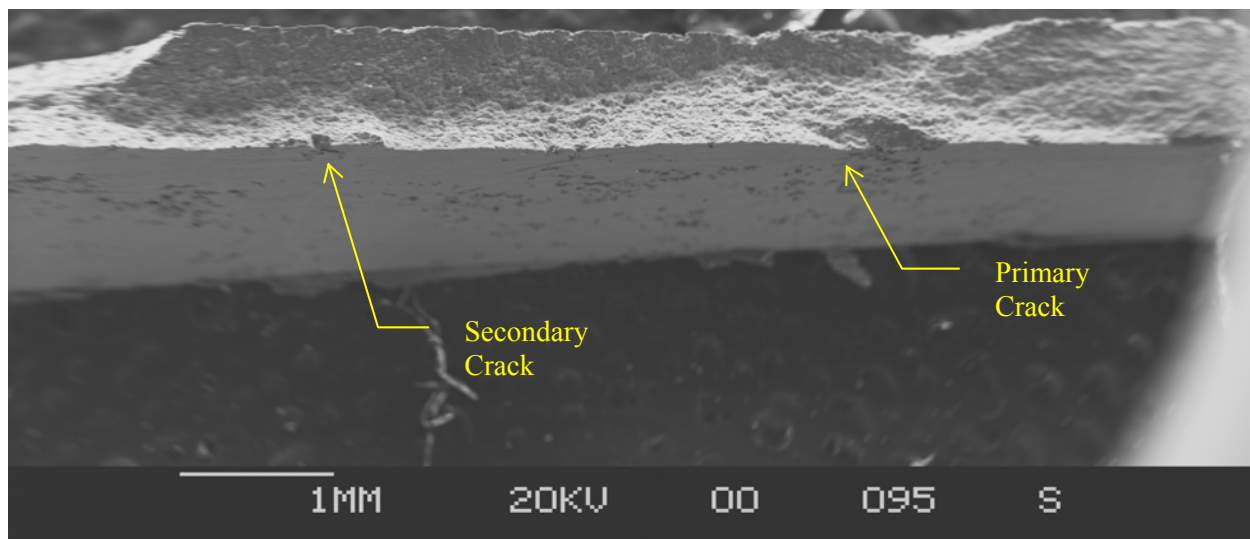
Fatigue Crack on Fracture Surface of Specimen 5879.
